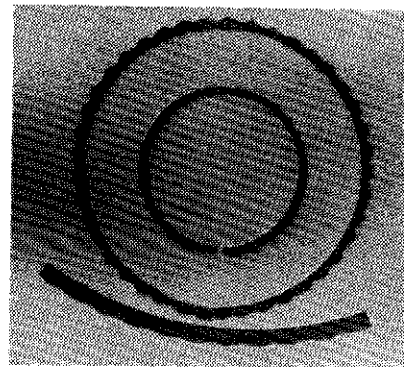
Application of this slitting technique to in-plane bending of soft aluminium strips having curvilinear edge ( $t = 1\text{mm}$ ).
